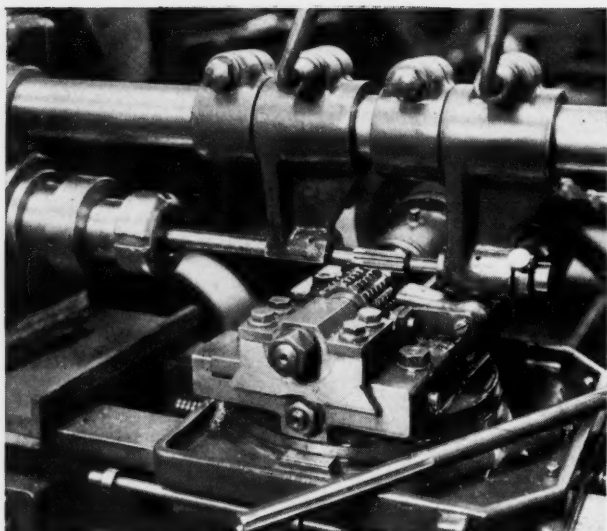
The splines of the drill press spindle are hobbled, accurately and economically, in this Barber-Colman hobbing machine.
